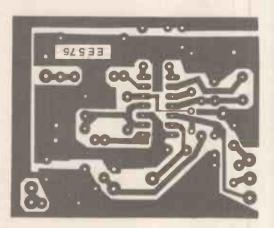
Component layout and full-size printed circuit board foil master pattern for the tuner stage. Note than an i.c. holder is NOT required here.
